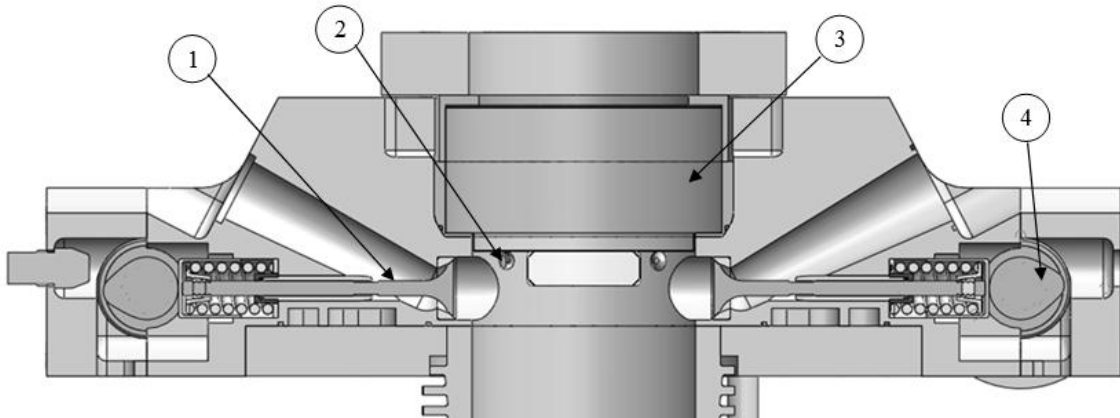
Section view of the final cylinder head assembly. 1. Exhaust valve 2. Spark plug 3. Overhead, optical window 4. Intake cam lobe
